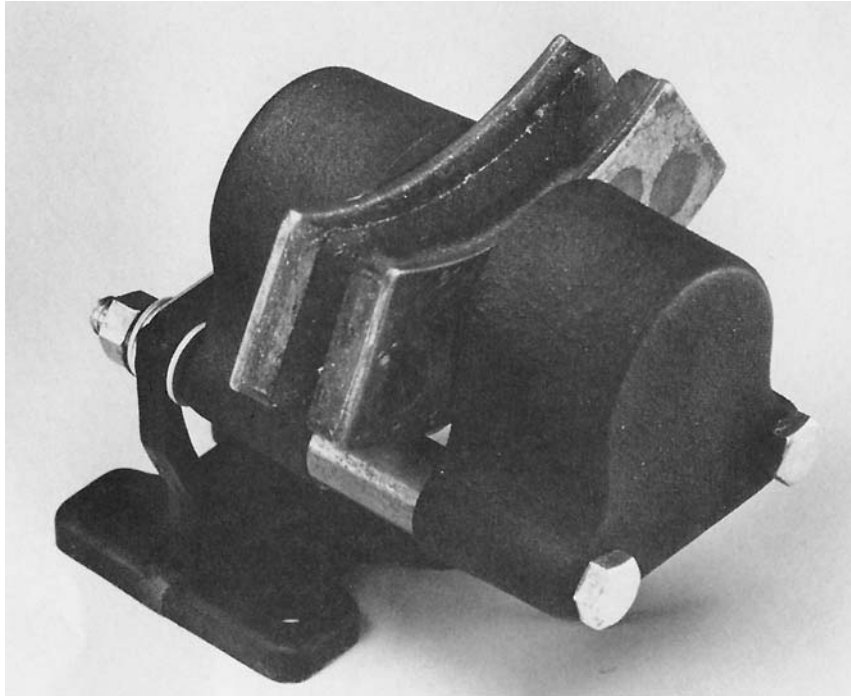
Annular sector caliper disk brake. (Courtesy of Horton Manufacturing Co., Inc., Minneapolis, MN.)
